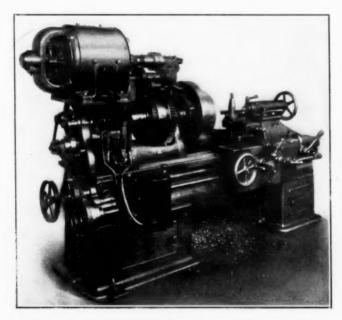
24-in. Fitchburg Lathe Driven by Motor, with Reversing Gears
